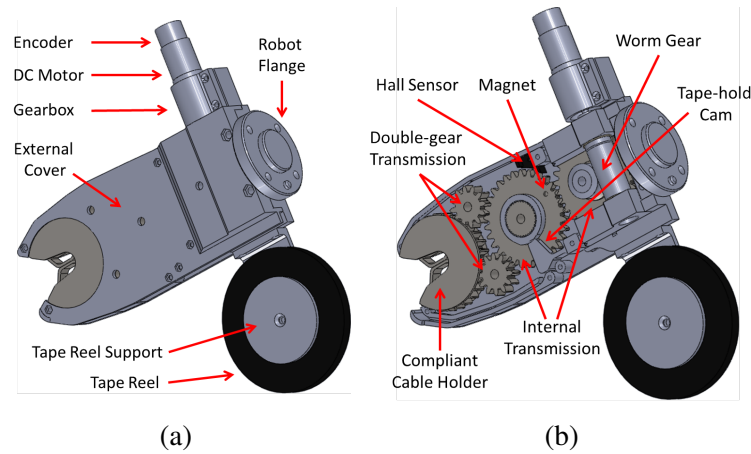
Taping gun CAD views: external (a) and internal (b).
